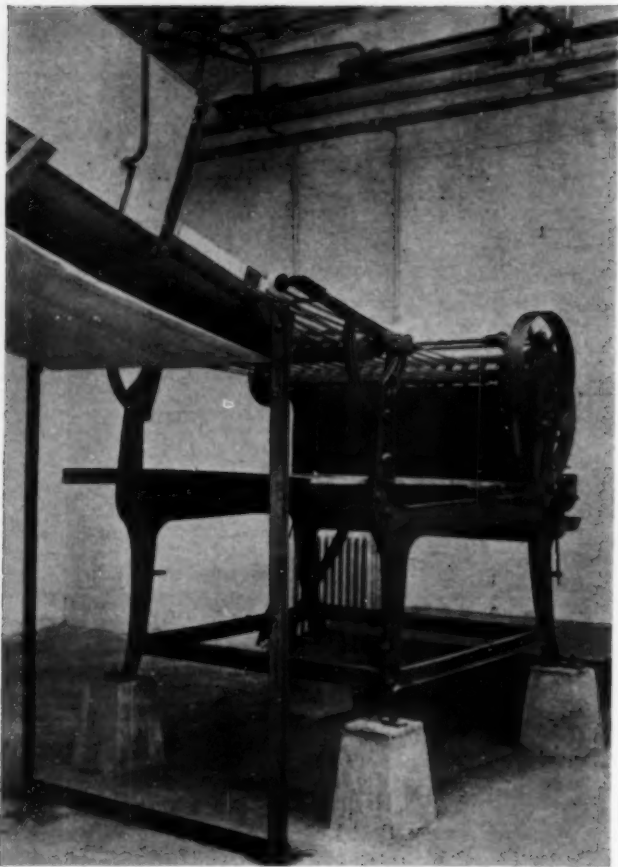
Coating machine for putting thin film of lacquer on reverse side of record sheets.
